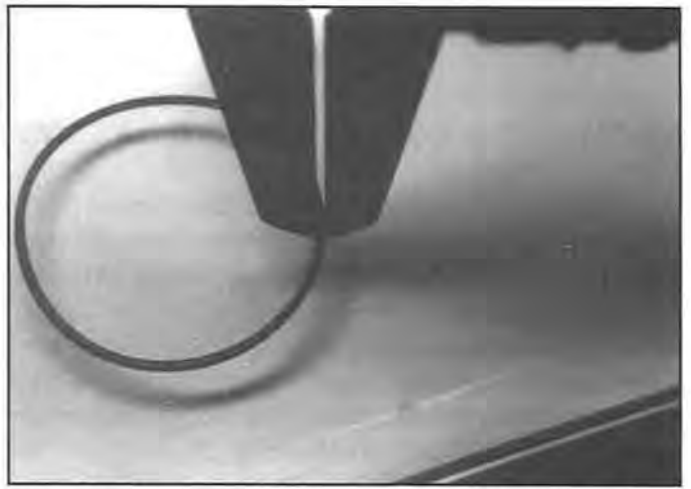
Measuring width of old gasket which is 0.70 millimeters.
